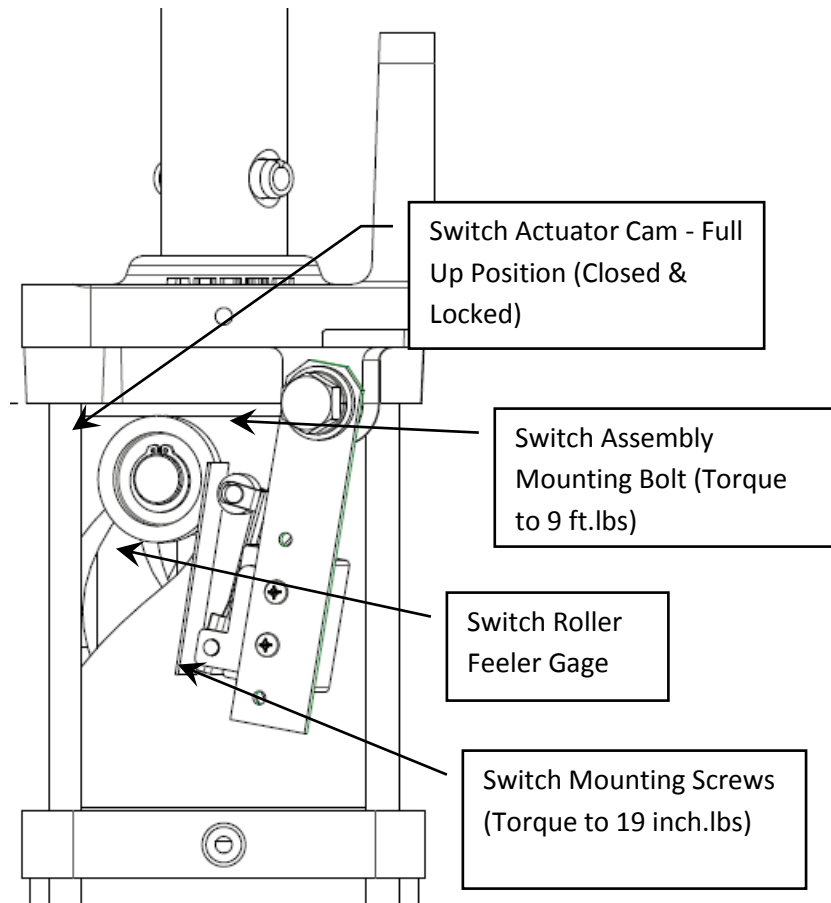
Rotary Operator Closed and Locked Limit Switch
